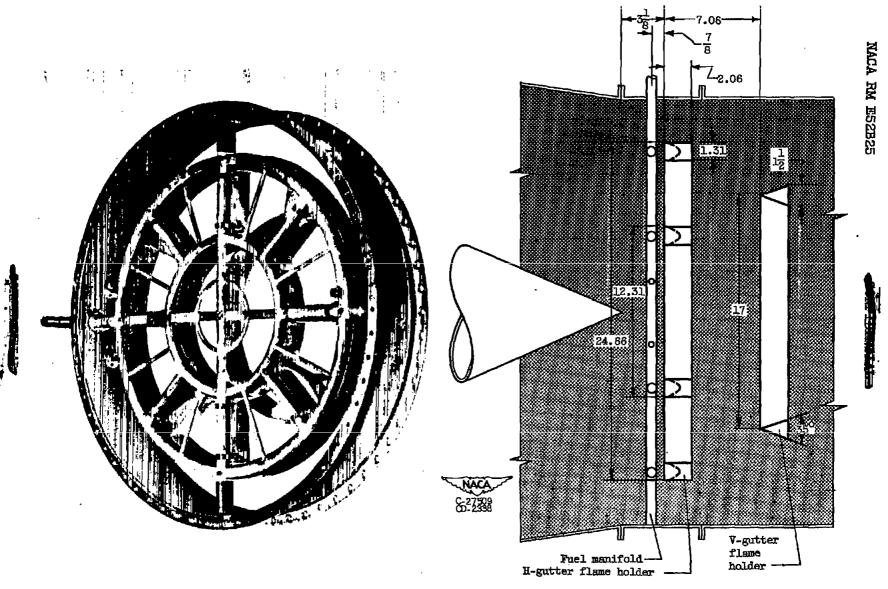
Inlet diffuser and afterburner assembly. (All dimensions in inches.)
